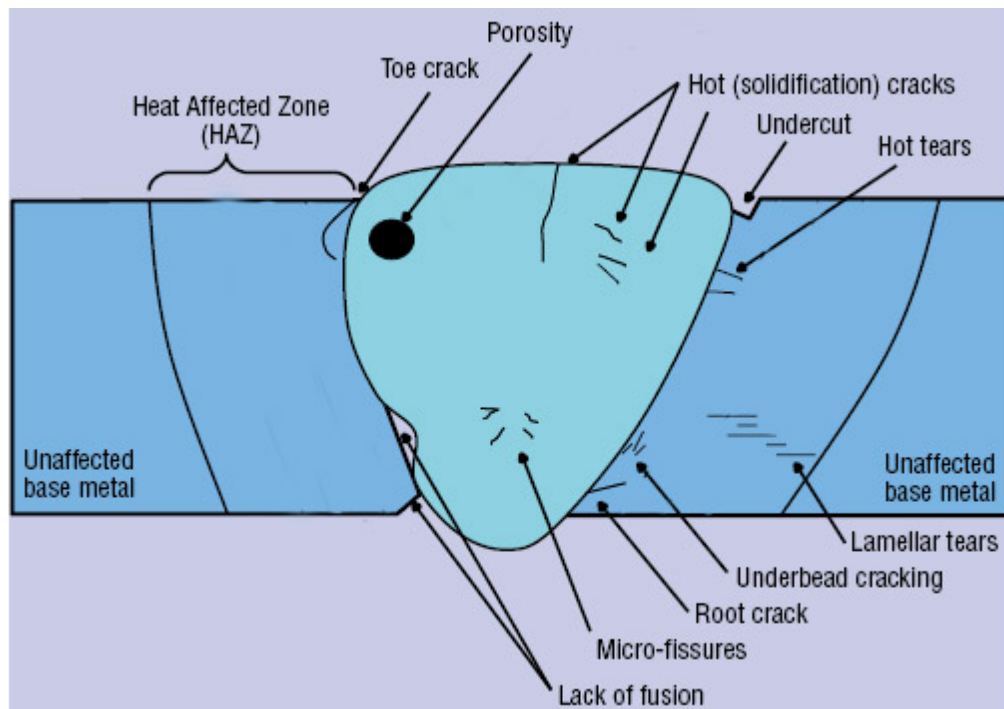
Drawing showing possible weld defects [27].
